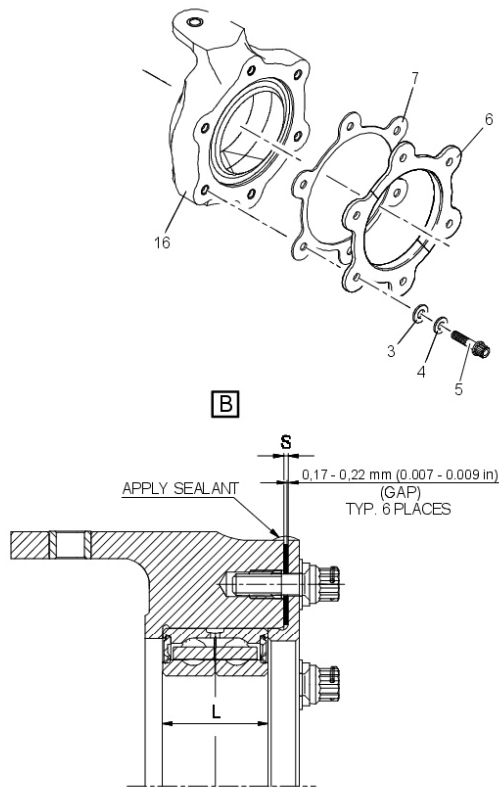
(sheet 1 of 5). Housing and slider group - Assemble procedure (Sleeve assy P/N 109G6430A03)
